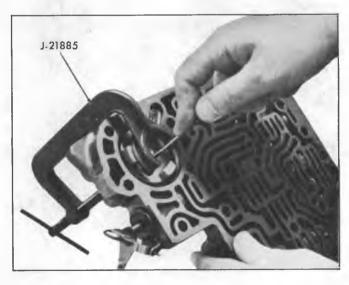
M--Removing Direct Clutch Accumulator Piston Retaining "E" Ring
